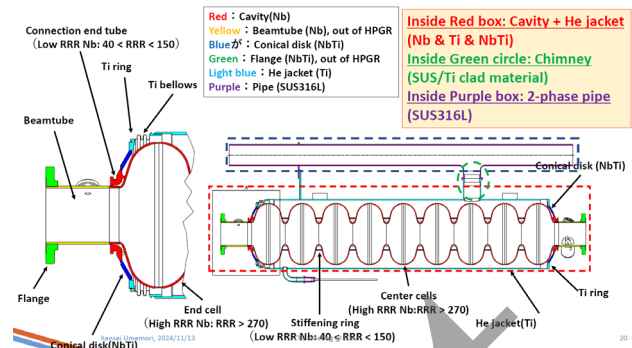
sketch showing ITN cavities in the jacketing configuration.
